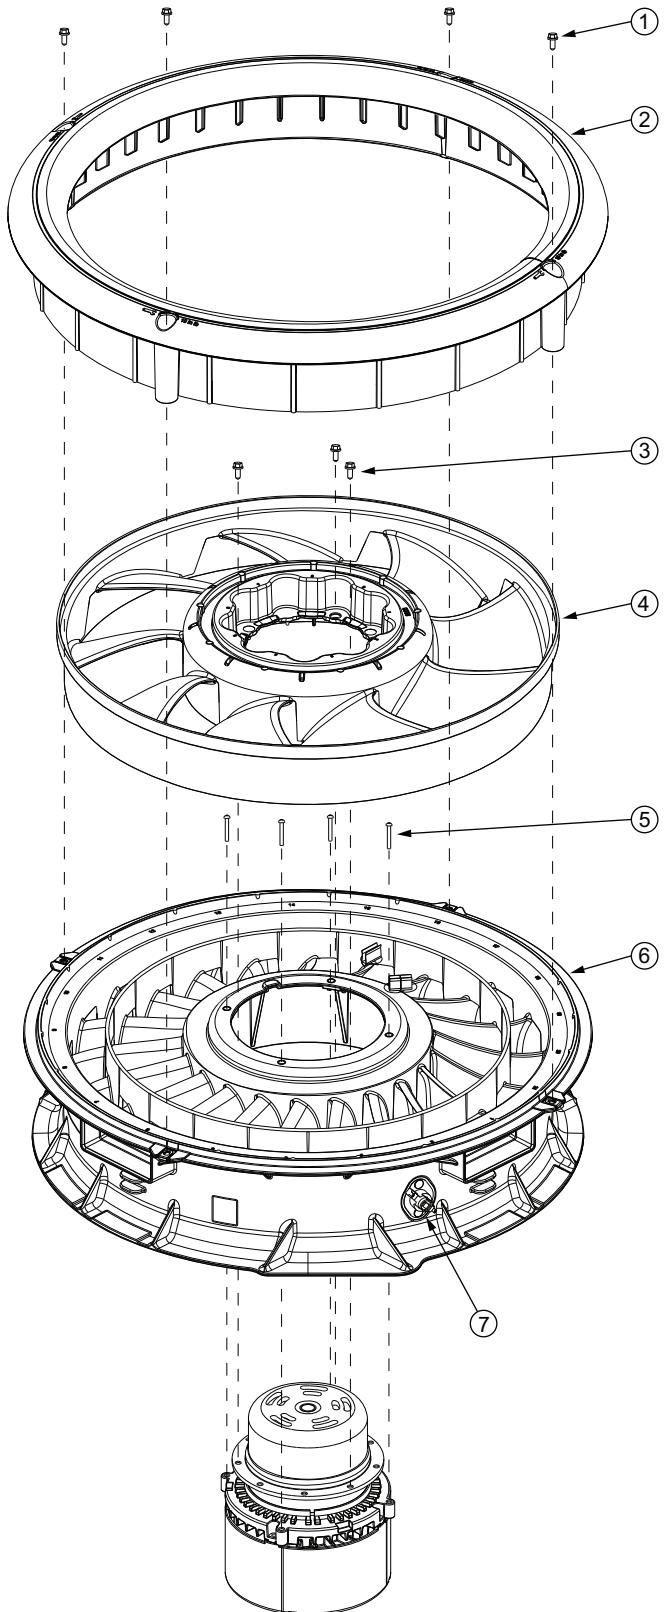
Fan Assembly for Units with 2.4 Hp Motor
